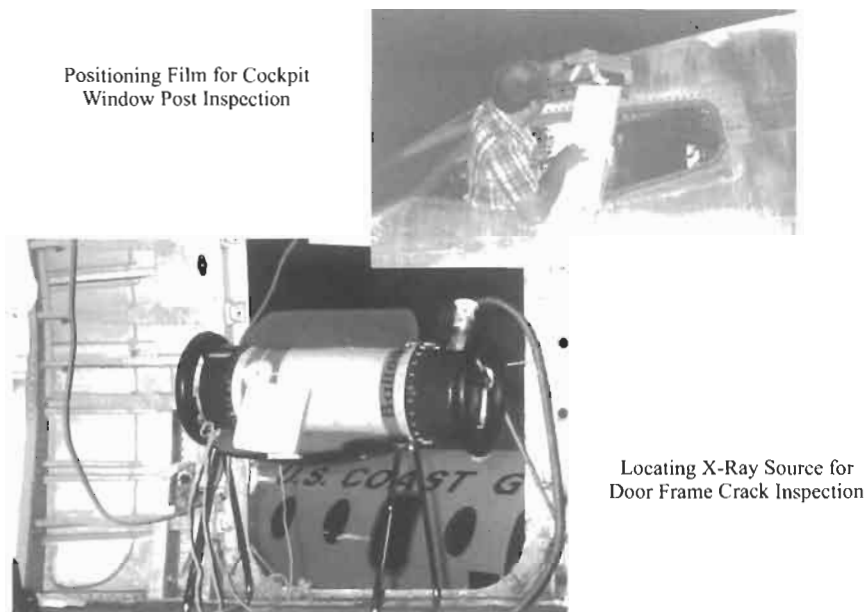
Aircraft fuselage inspection for cracks using X-radiography.
